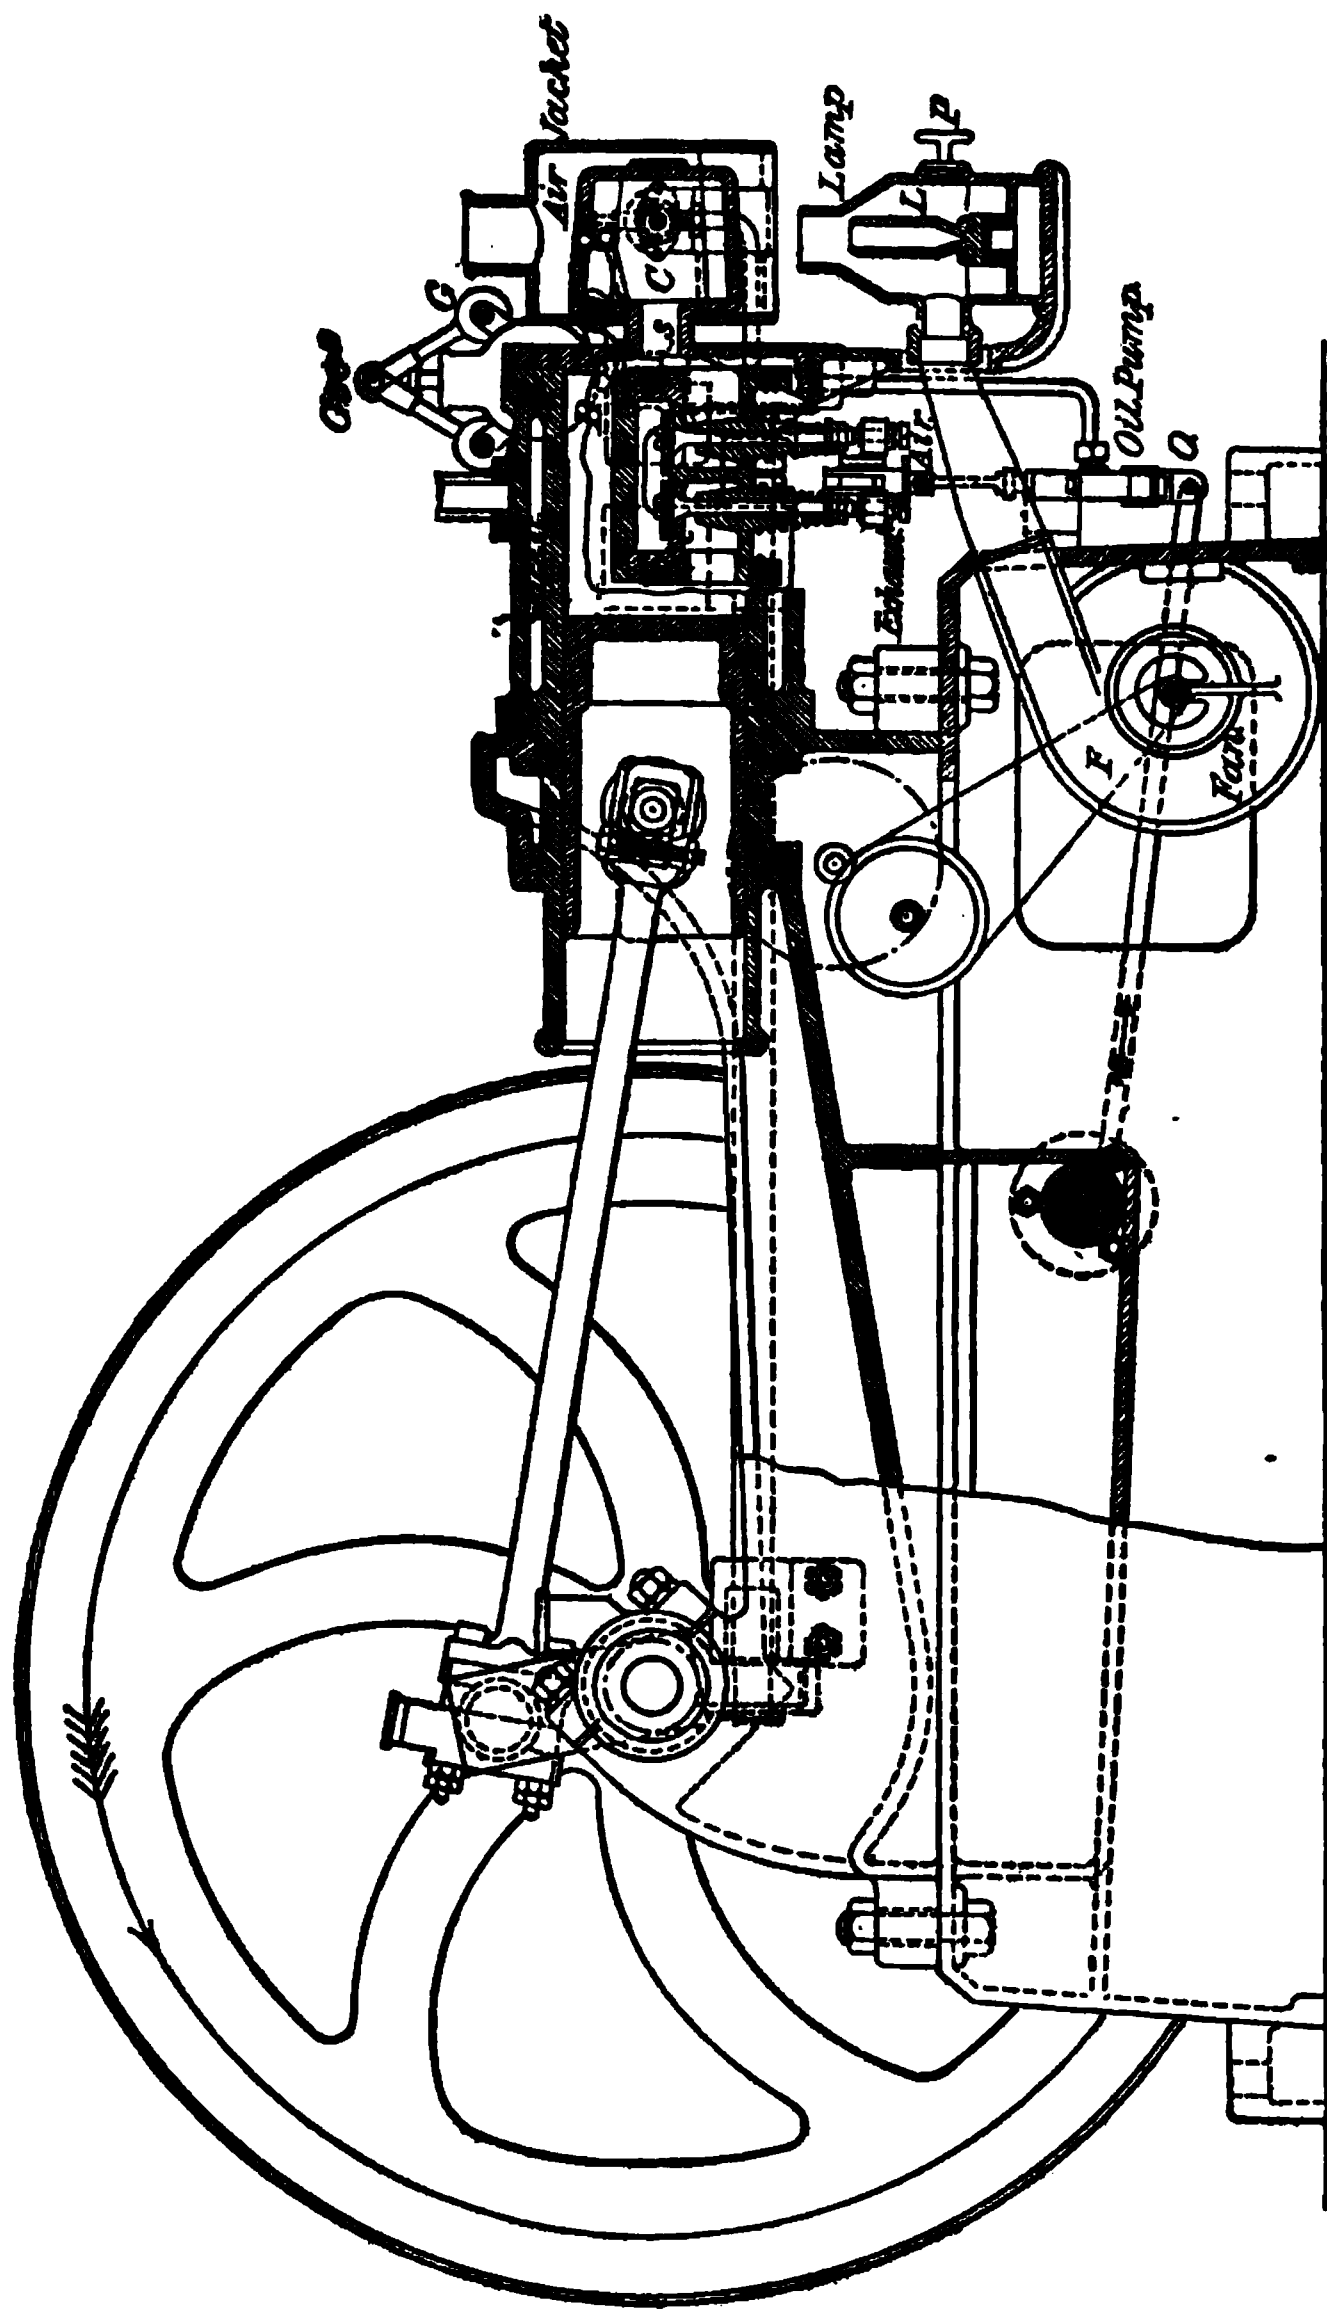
Hornsby-Akroyd Engine—Sectional Elevation. 1892.
